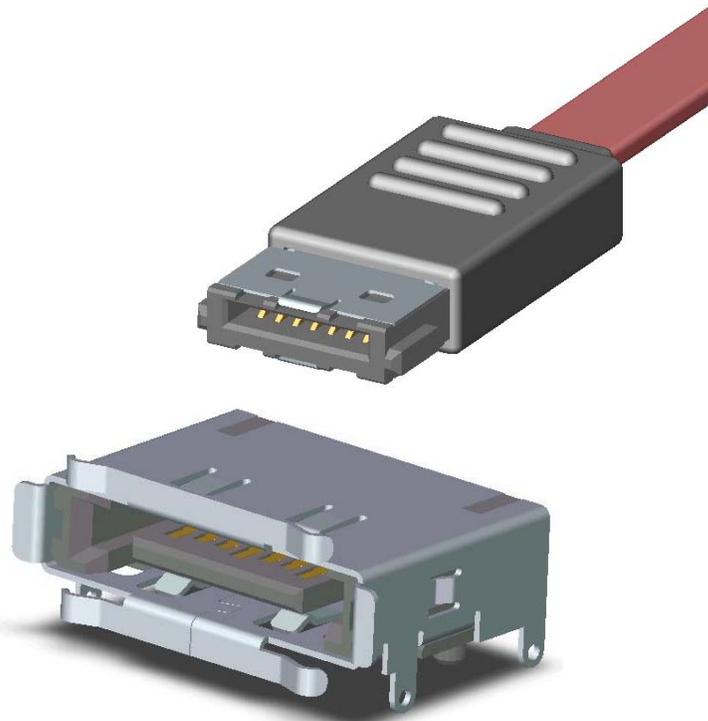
CAD models of the new cable end connector and PCB receptacle for the external consumer SATA cable.
